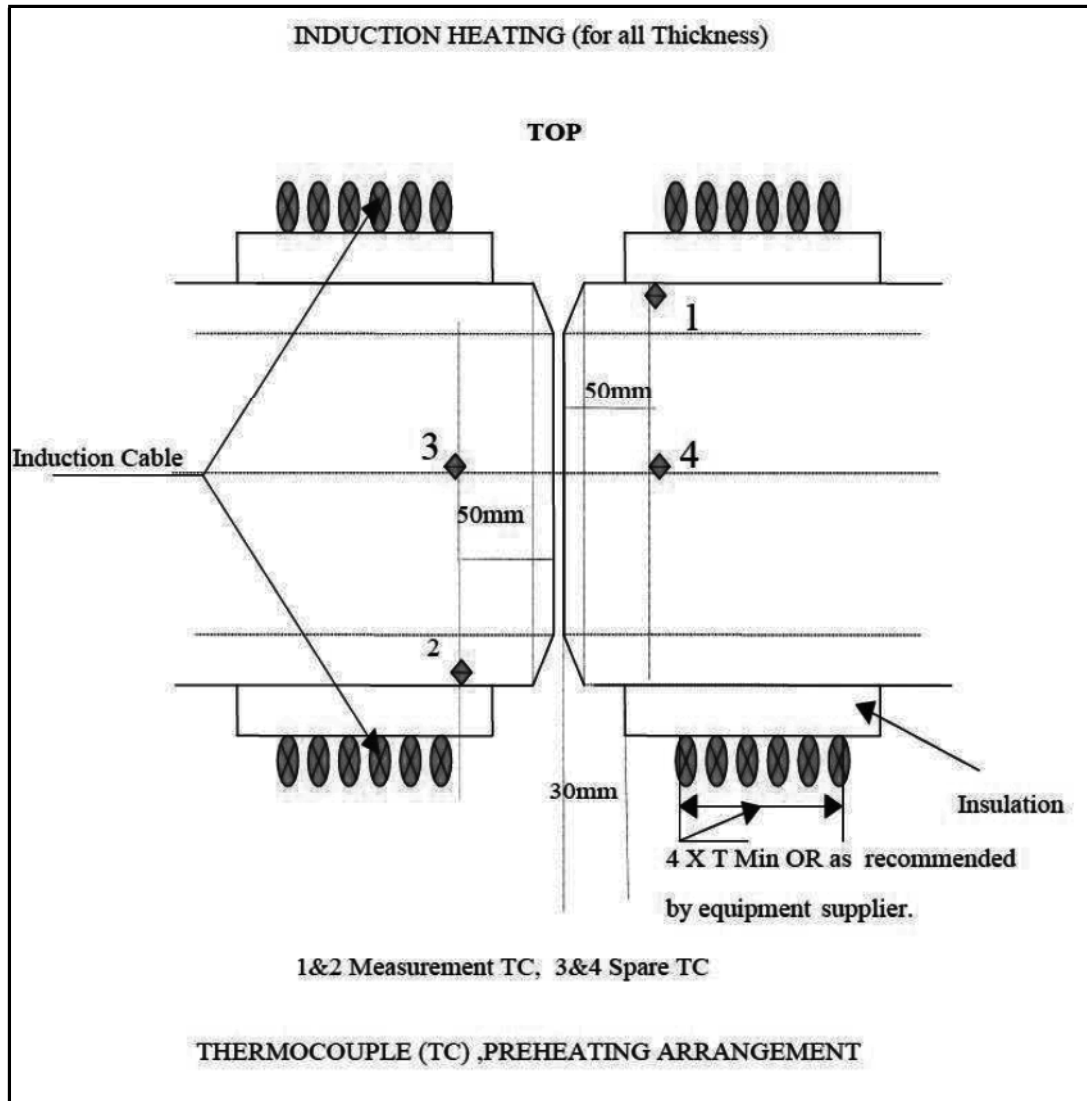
Placement of Thermocouples on P91/P92/F91/F92/C12A materials for Preheating
